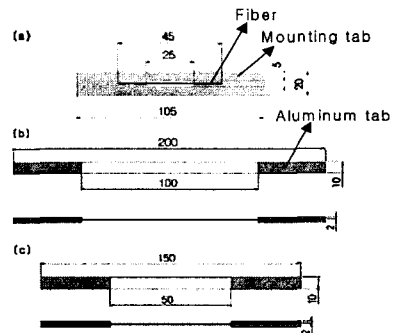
Dimensions of tensile test specimens : (a) single fiber, (b) matrix and (c) composite. (unit : mm)
